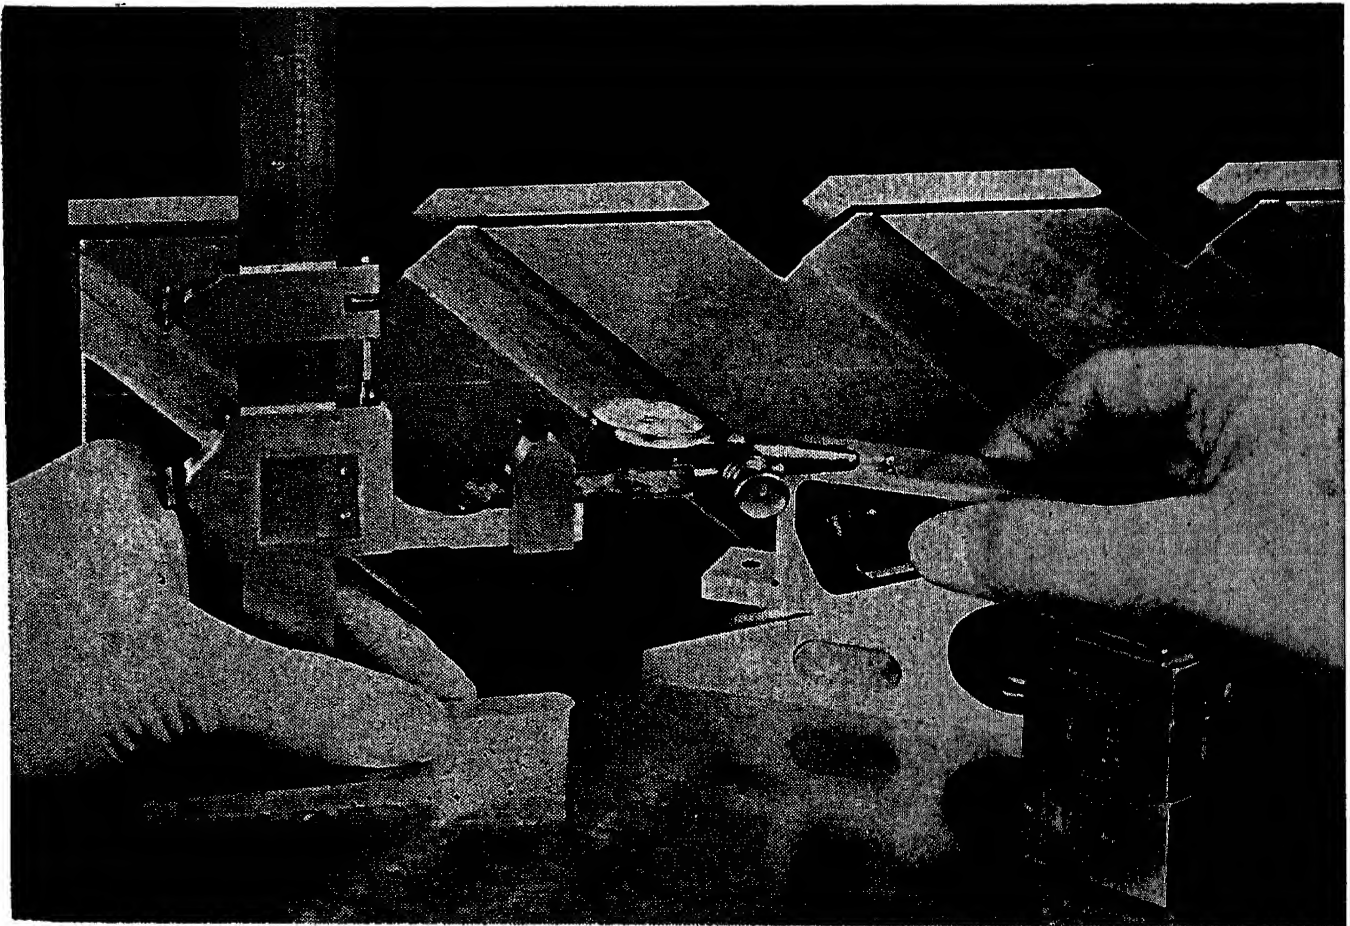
A vernier height gage and a dial indicator being used to set a planer gage from a stack of gage blocks. (Courtesy The L. S. Starrett Co.)
